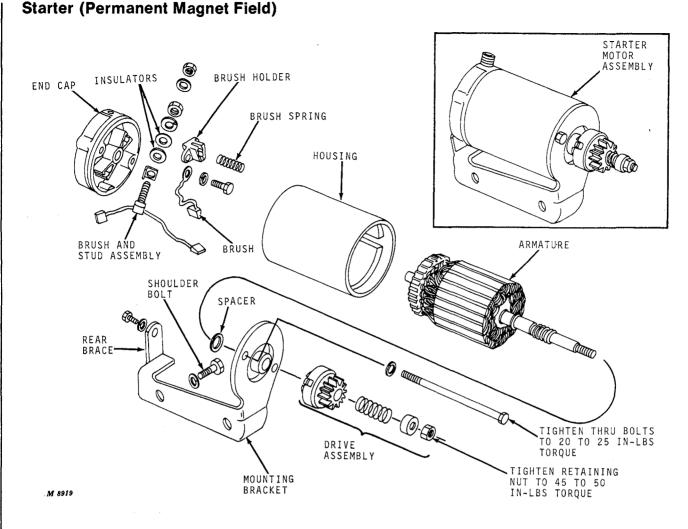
Starting Motor Components—Permanent Magnet Starter
